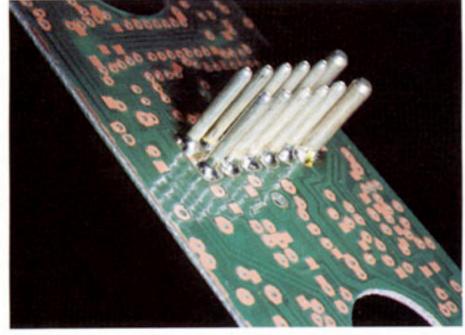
E. Heavy silver alloy coated connector pins solder directly to this printed circuit board used in automotive electronic systems. The ordinary wave soldering process does not deliver enough heat for a good joint. SPIRFLAME® eliminates cold solder joints completely.
